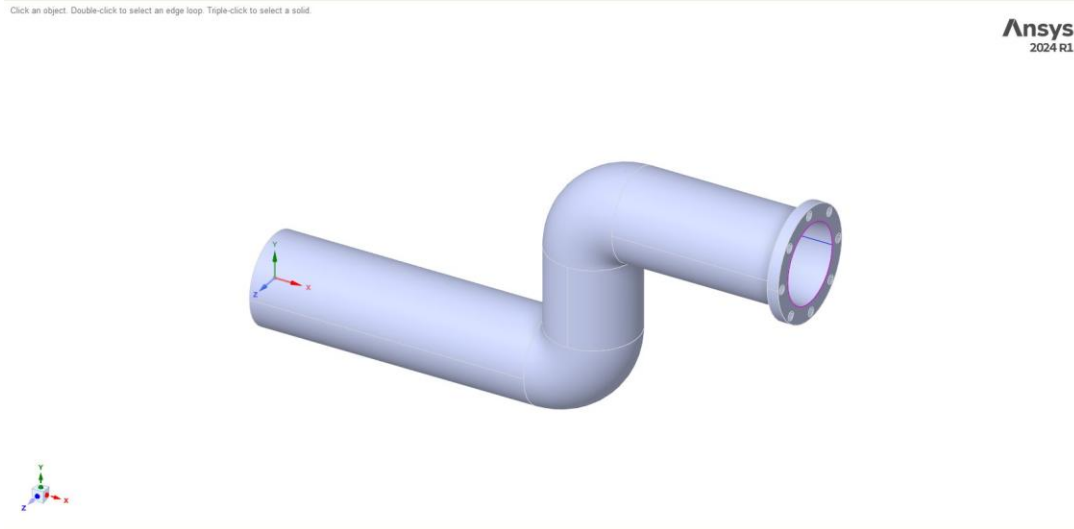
Alternative view of the same geometry, showing the 150 mm OD flange and the 8-hole bolt pattern at the outlet end. The 2 mm fillet at the flange-to-pipe transition is visible as the slight chamfer between the cylindrical pipe and the flange face.
